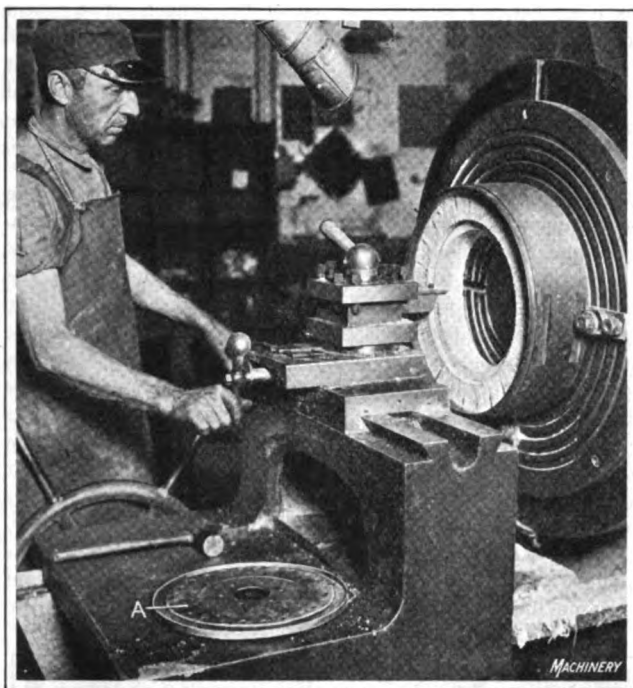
Machining the Groove to receive the Edge of the Side Plates
